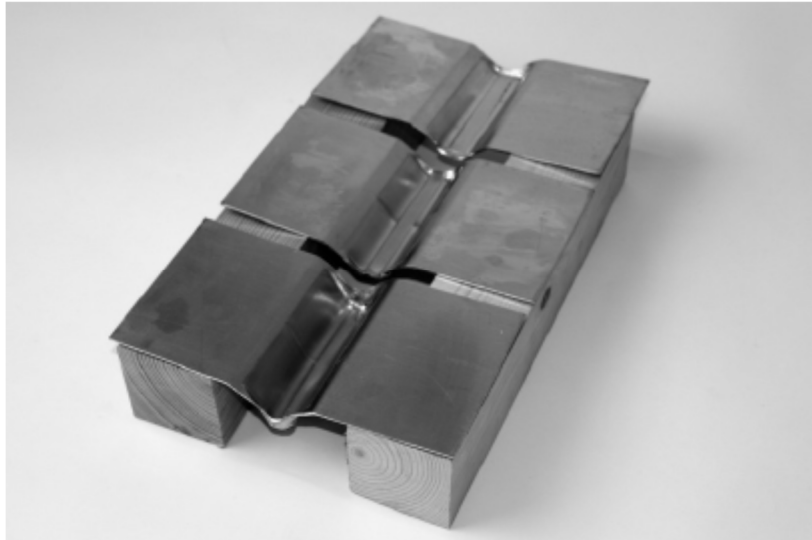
Tunnel shaped parts formed using Single Point Incremental Forming (SPIF)
